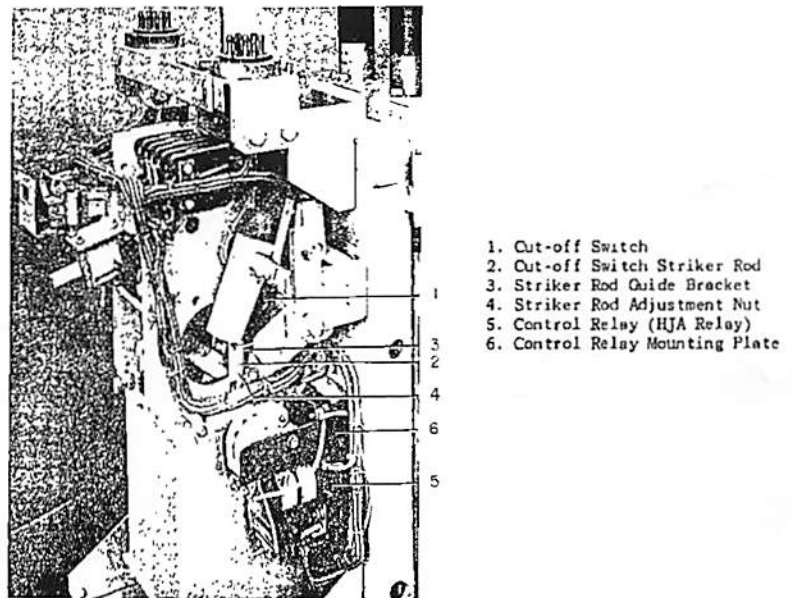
Side View of Control Relay and Cut-off Switch Assembly
